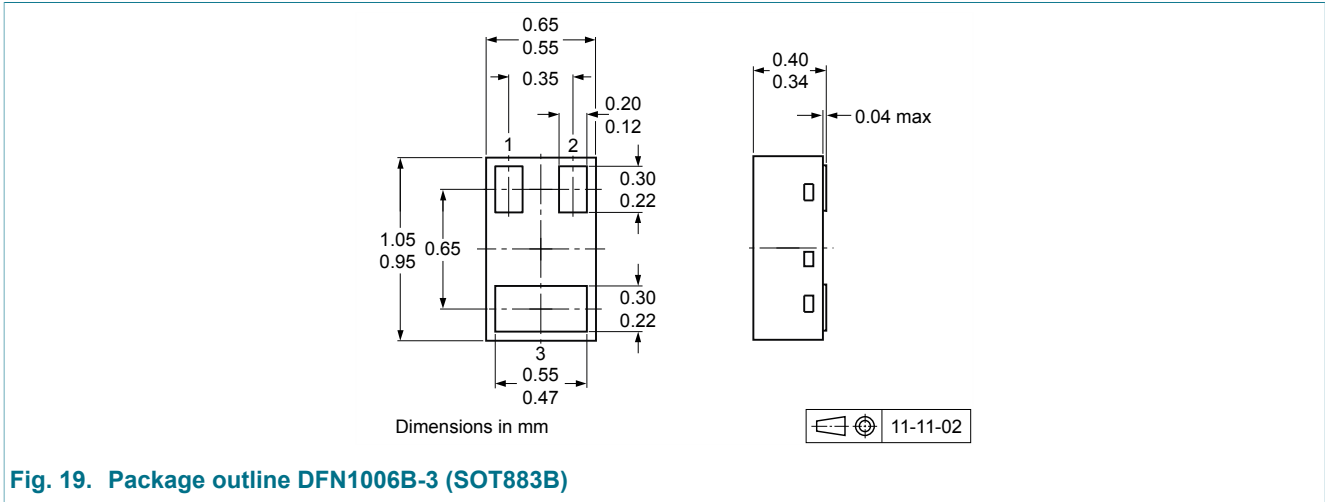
Package outline DFN1006B-3 (SOT883B)
